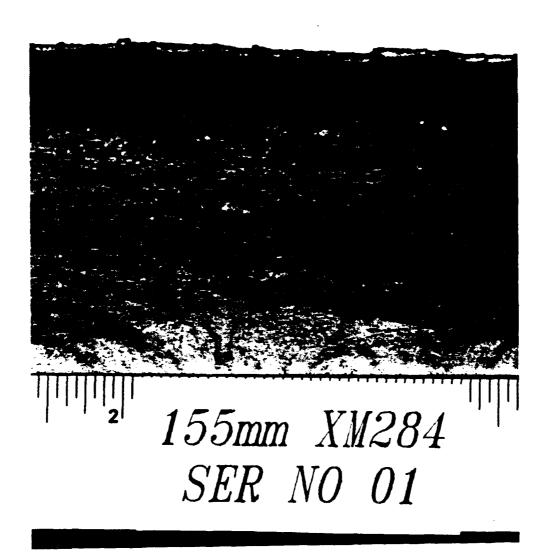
155-mm XM284 Tube SN1 fracture surface.
